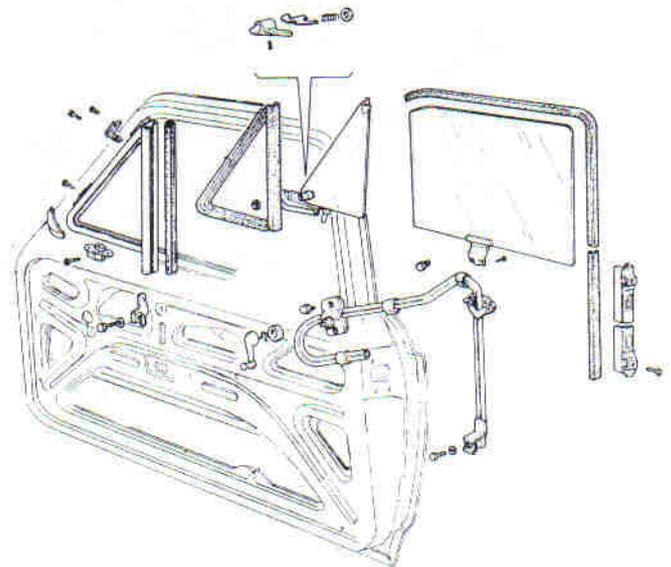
Typical front door window assemblies (Secs 14 and 15)
